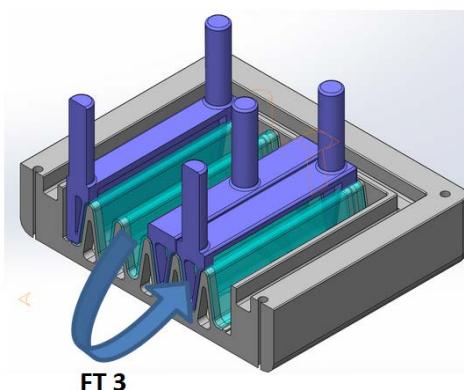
Filter Tool 3 Removal & Insert into 5th slot
